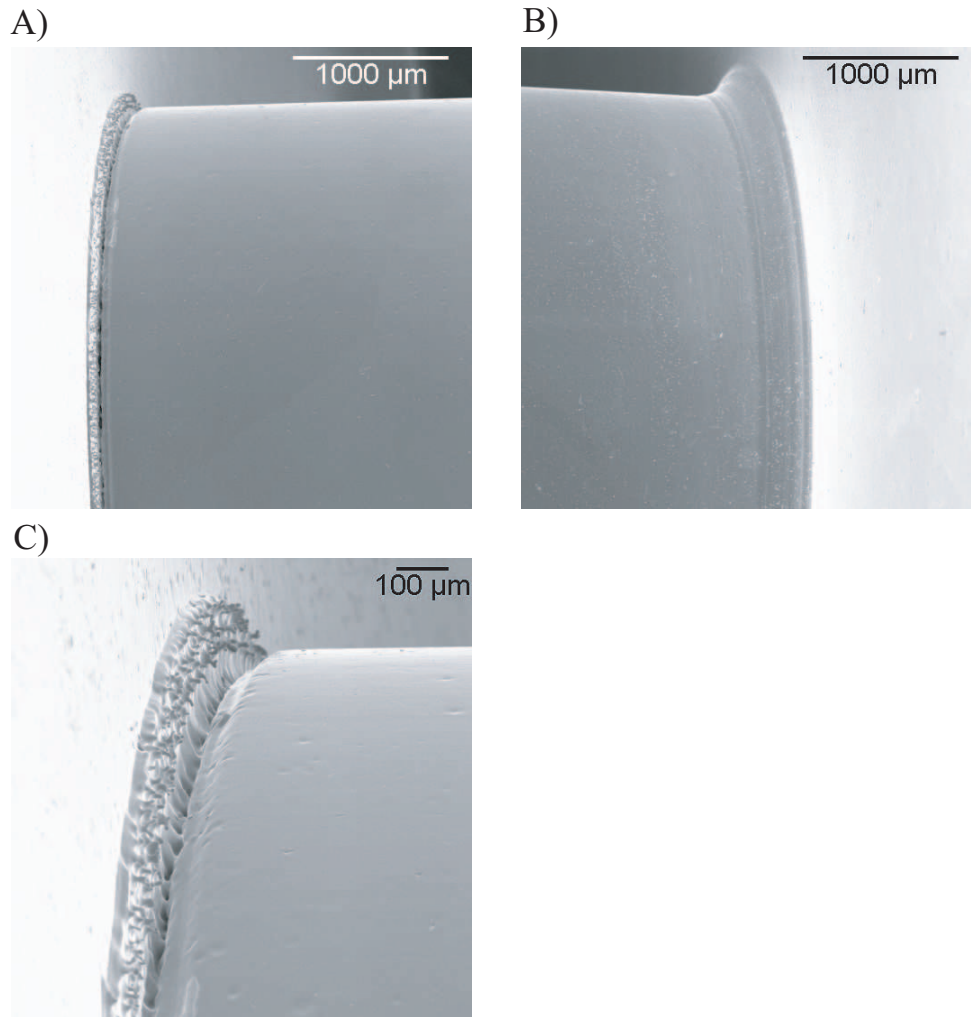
SEM micrographs of PBG structure rod 4 [66]. A) and B) show the undamaged surface of the brazed and machined ends of rod 4, respectively. The brazed joint is shown in detail in C); Braze material has collected annularly around the rod, and the joint itself is slightly convex.
